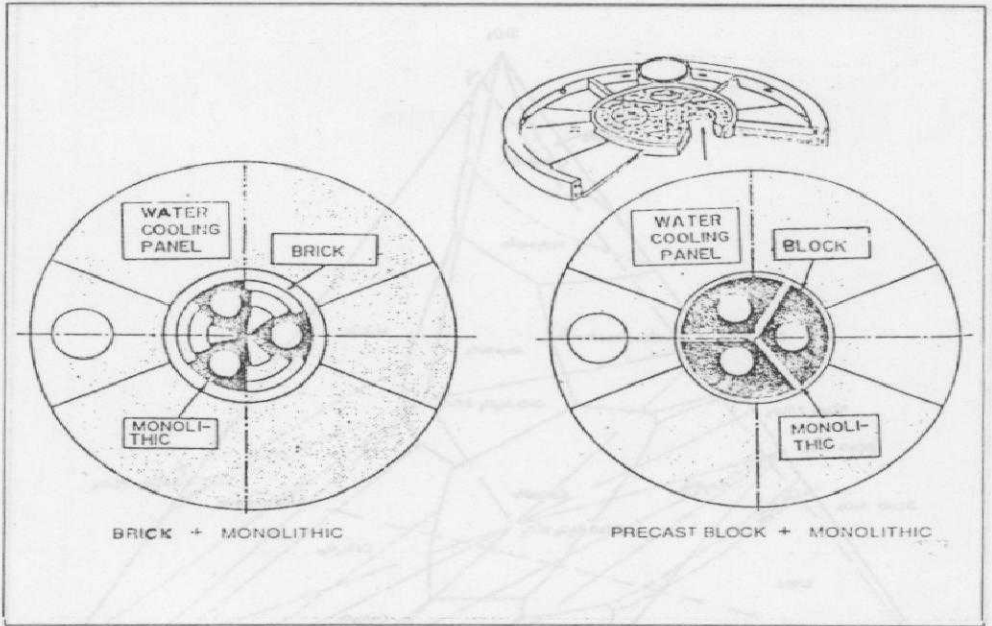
Example of lining of top roof when the outer ring roof is water-cooled
